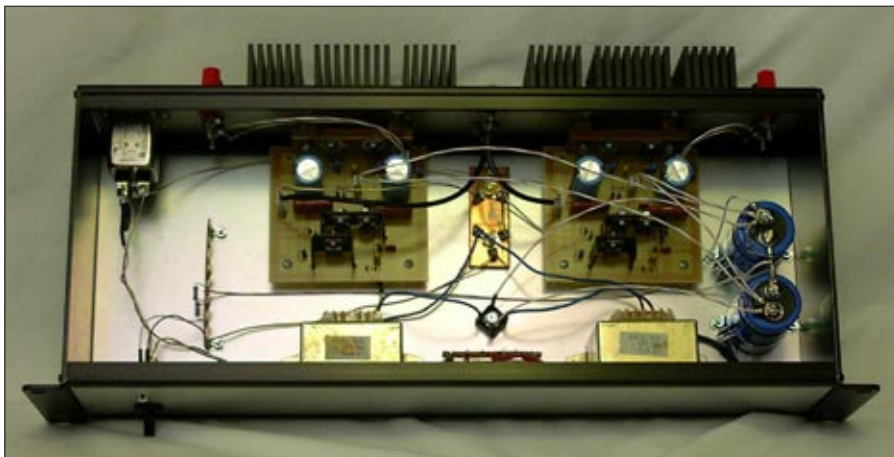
Modified Simon amp inside view. Parts placement is not critical. This arrangement places the power transformers as far as possible from the circuit boards.
